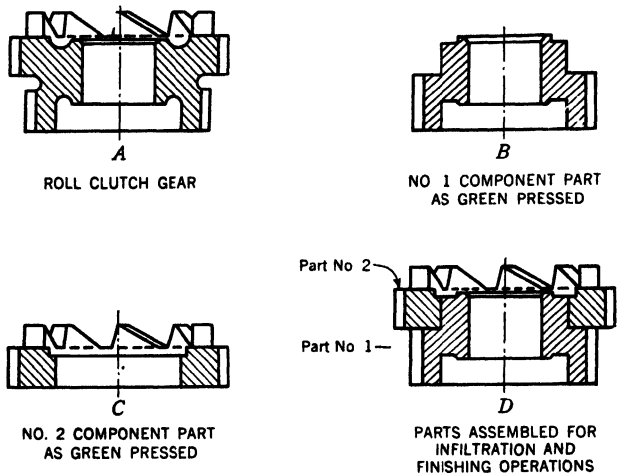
Diagrammatic presentation of a roll clutch gear composed of two infiltration-brazed cemented steel sections. The original design (A) was broken down into two separately pressed parts (B and C) then assembled and infiltrated to give a final size, brazed unit (D).
